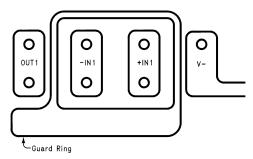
Example of Guard Ring in Printed Circuit Board Layout
